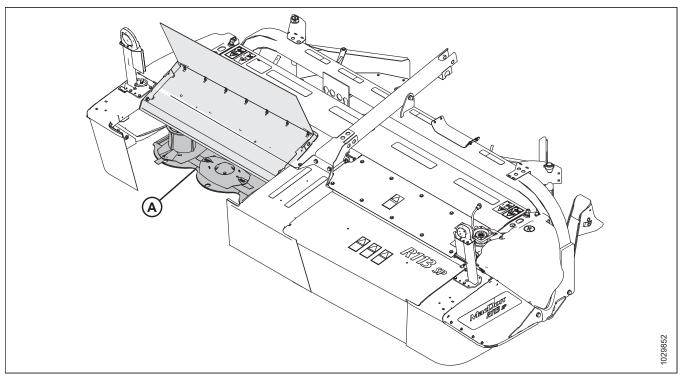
Cutterbar - R113 SP Shown, R116 SP Similar
